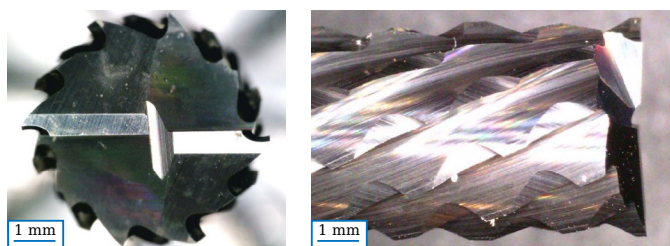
Geometry of the selected milling tool, face (left) and side (right).
